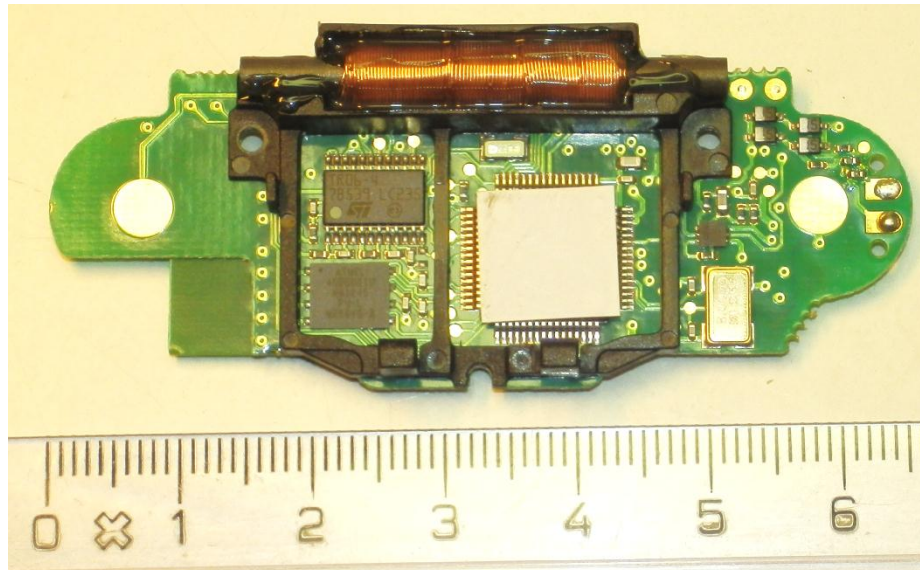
Transmitter module PWBA, front view without BT-module and coil. Shield removed.
